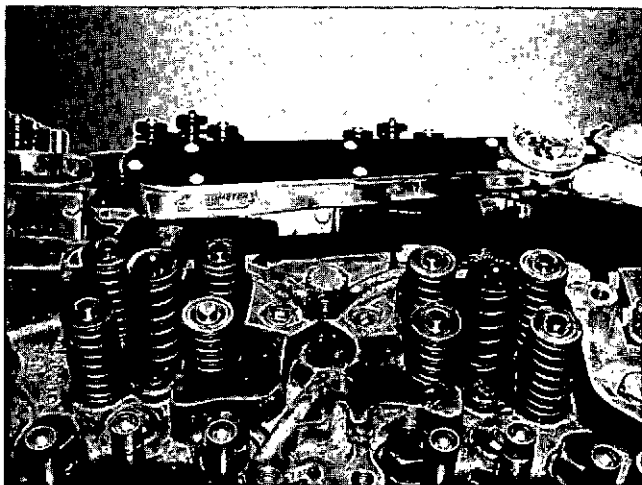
, V414160. Tighten injector mounting capscrews
